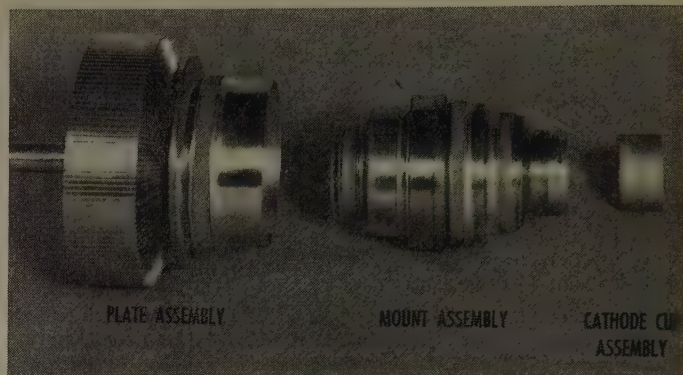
Plate assembly, mount assembly, and cathode cup assembly.
